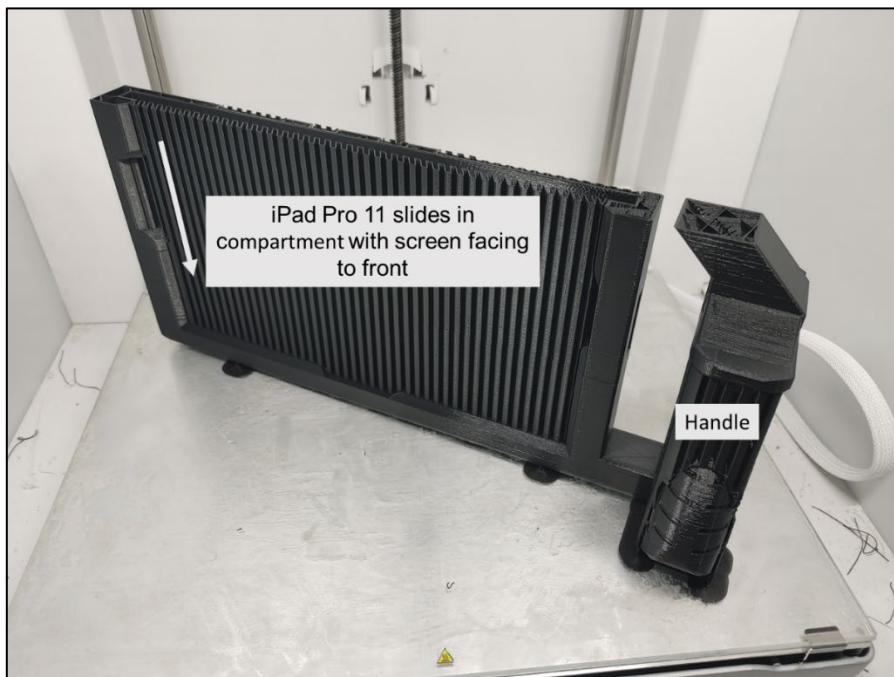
3D printing the iPad holder using an Ultimaker 5 printer.
